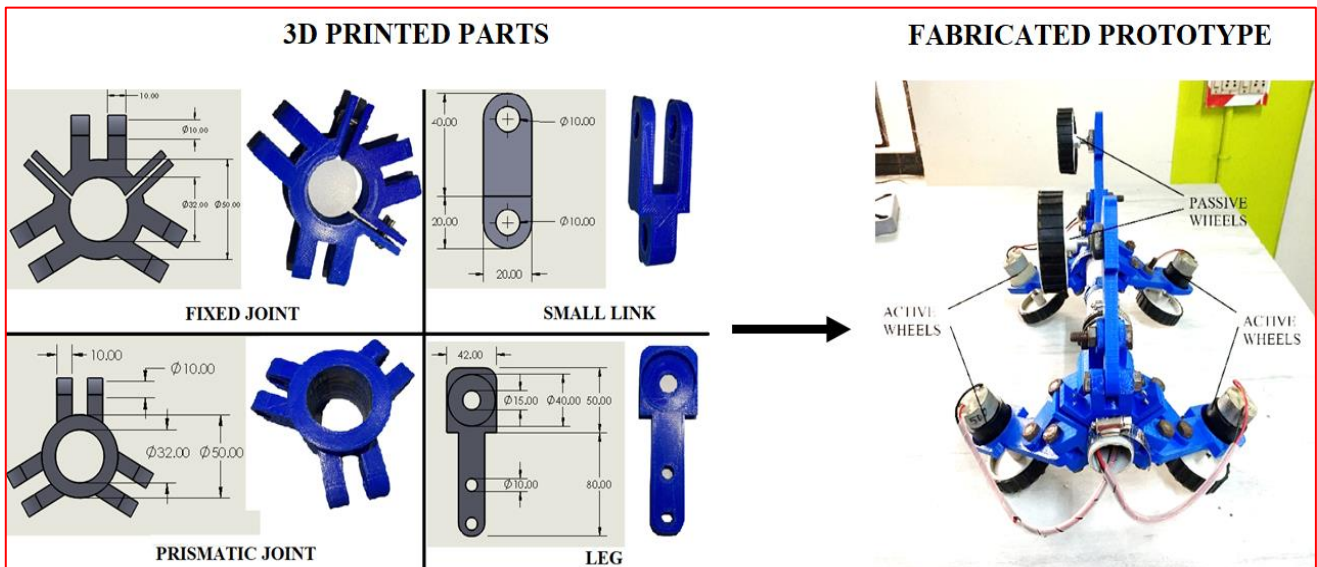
Fabrication of IP-IR components through 3-D printing and Final Assembled IPIR
